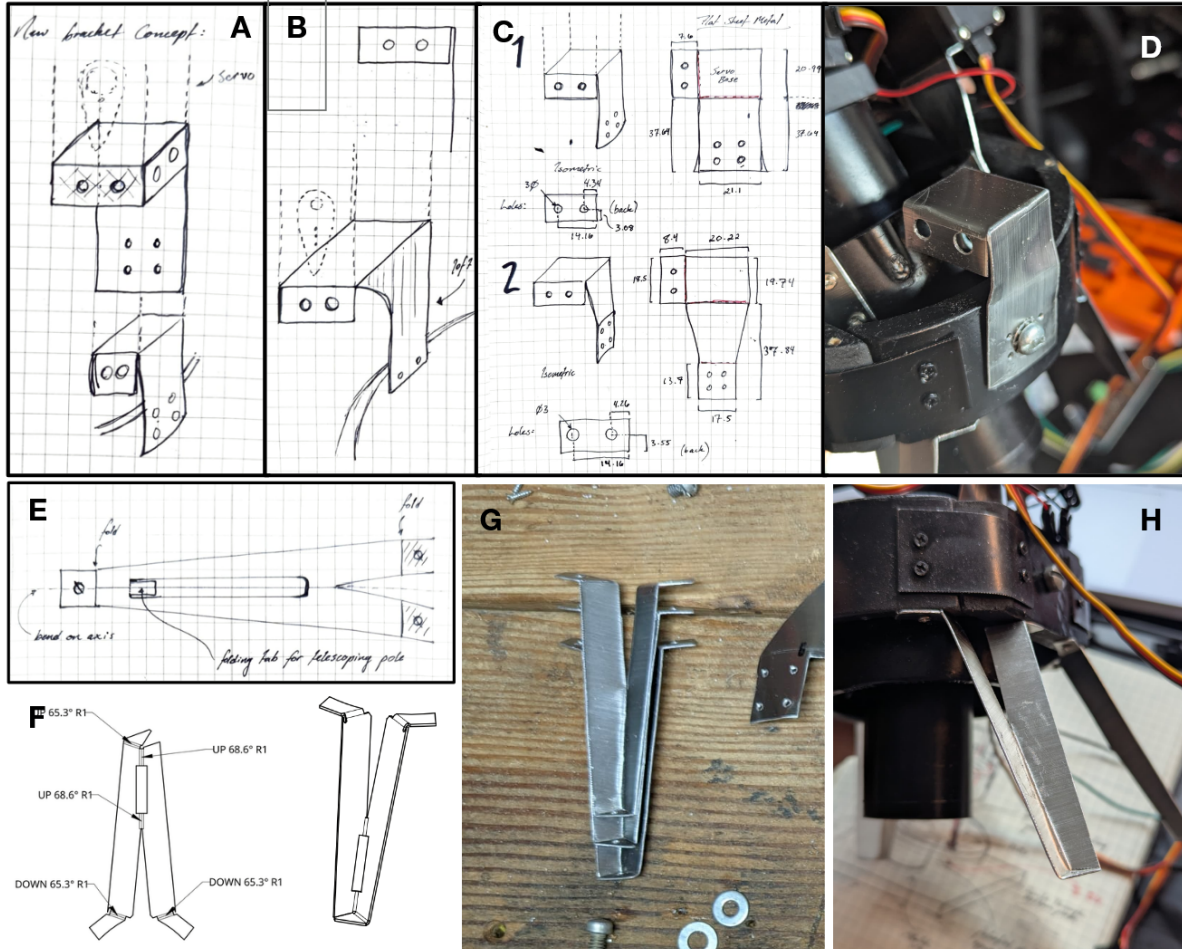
A-D) Sheet metal servo bracket design sketches, templates, and hand-fabricated implementation. E-F) Sheet metal leg design sketches, templates, and hand-fabricated implementation.
